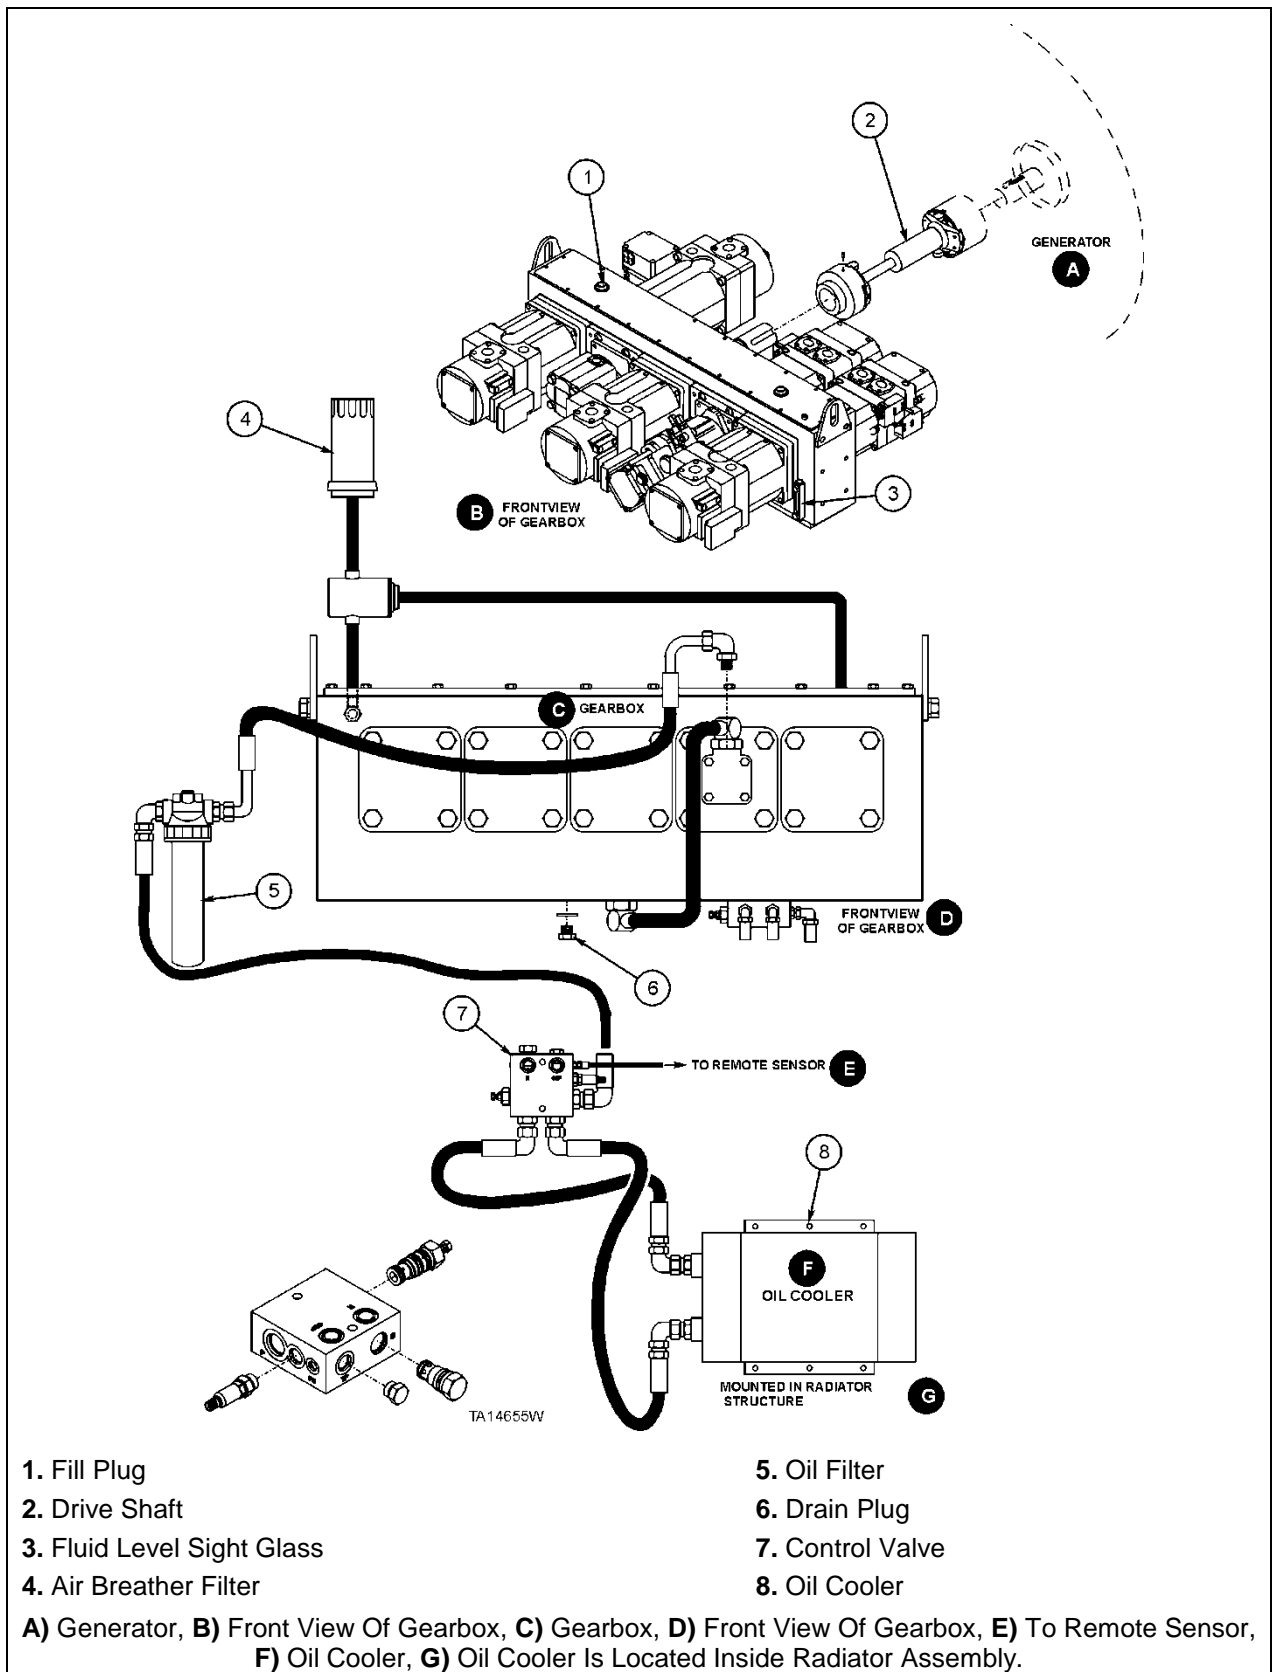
Hydraulic pump gearbox service points (typical gearbox and pump layout shown)
